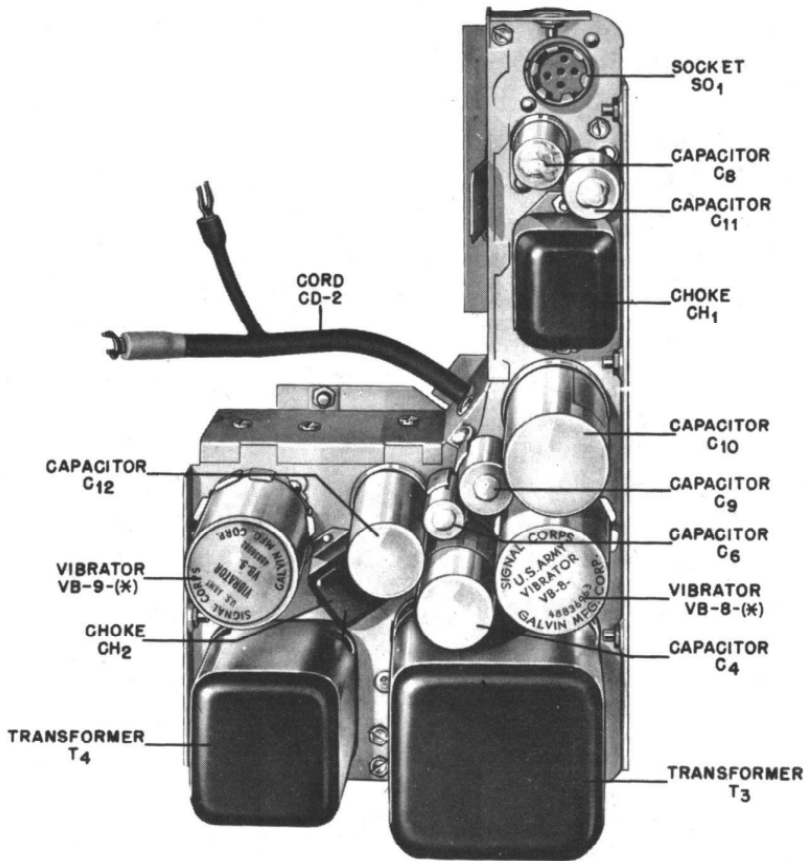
Power Supply Unit PE-157-(\*), Chassis Top View
